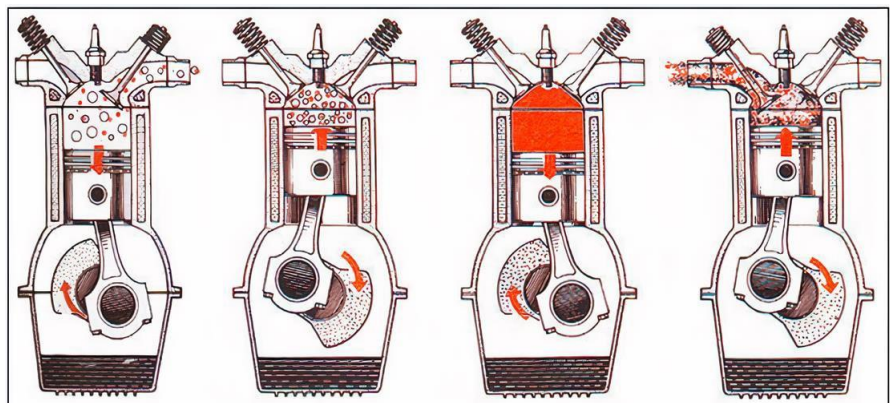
Four-stroke engine duty cycle- soaking, compression, combustion and expansion, exhaust [5]
